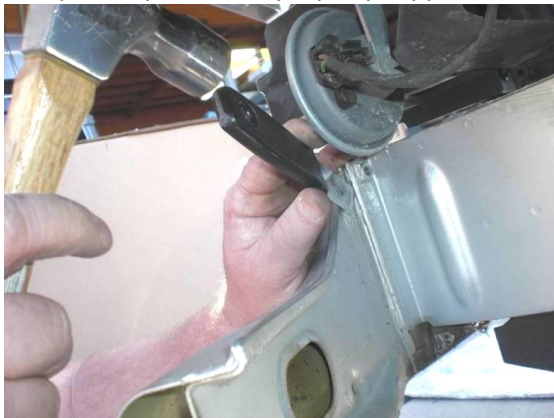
Releasing the Stock Steel Bumper from the Vehicle Using a Putty Knife and Hammer
